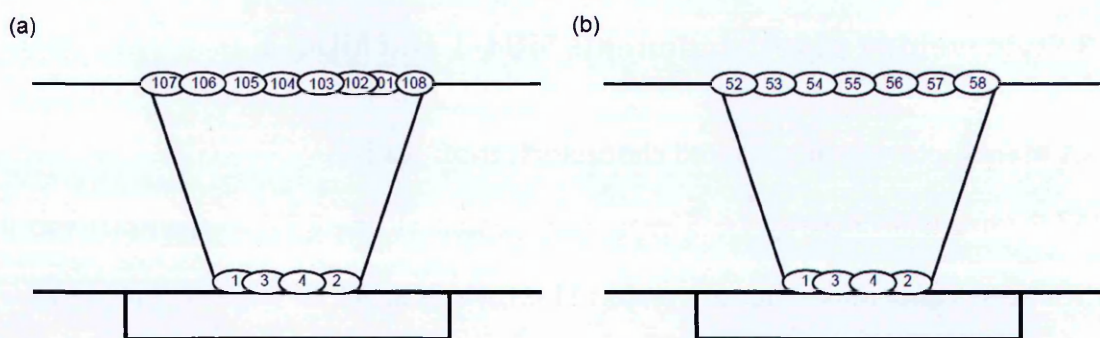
Weld pass sequence of STYLE pipe components (a) MU4-1 and (b) MU4-3.
